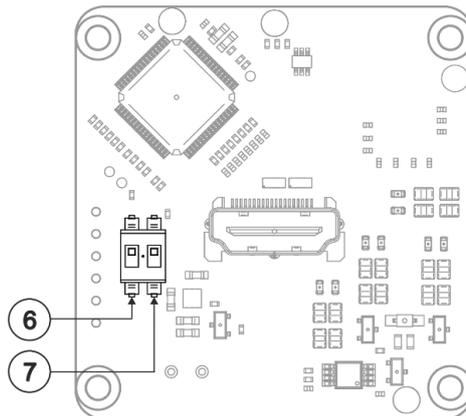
WP-872xr Line Receiver Wall-plate – Front Panel Before Assembly
